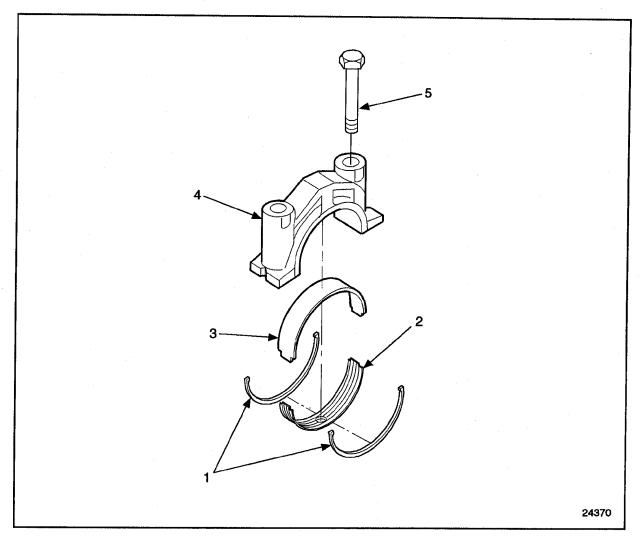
Main Bearing Caps, Bearing Shells and Crankshaft Thrust Washers
